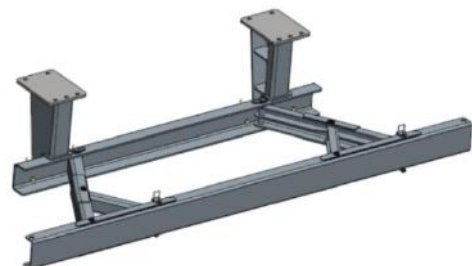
Sliding Rear Underride Protection Device 3D Design
